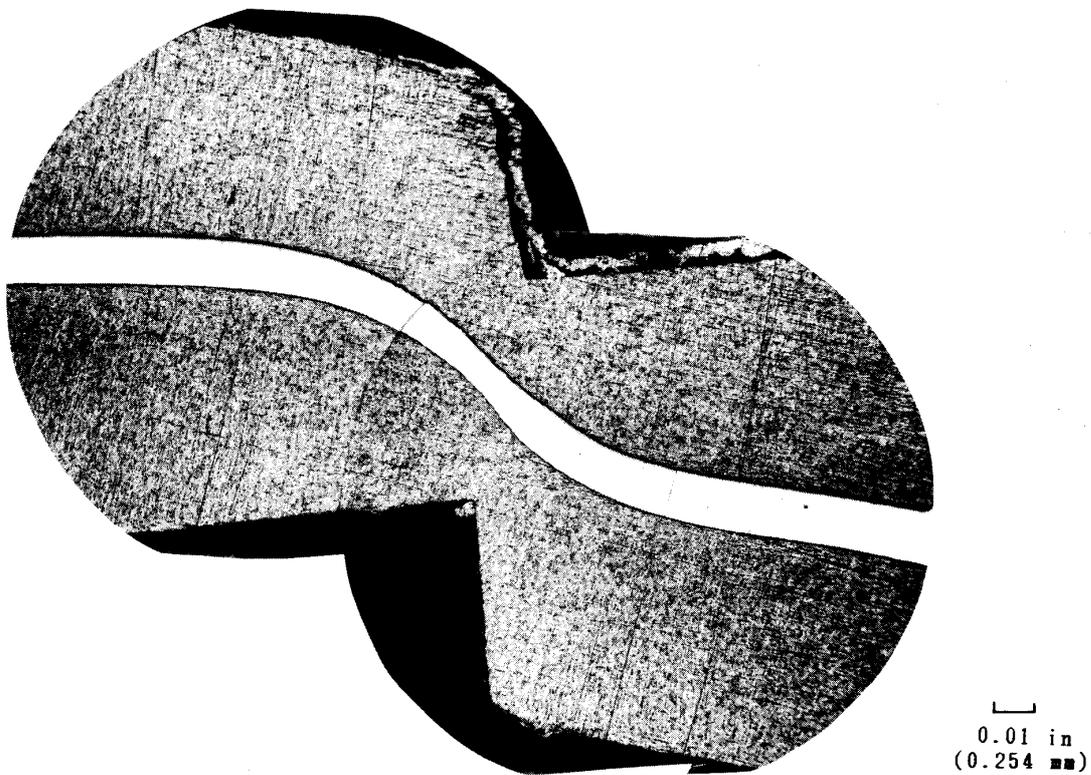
Al-clad SS Half-Way Specimen Section
